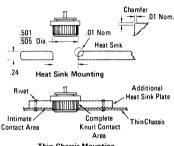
MOUNTING DETAILS FOR PRESSEIT THYRISTORS
